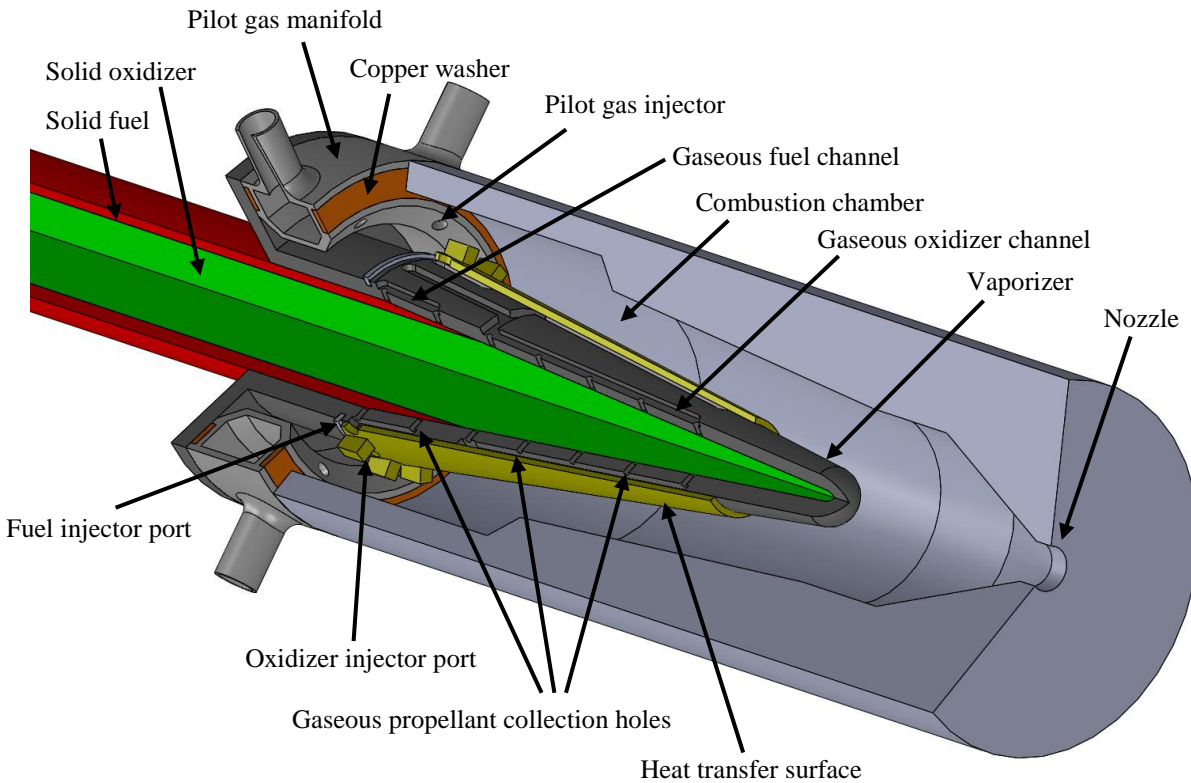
A cutaway drawing of the engine. The flap valves over the injection ports are omitted.
